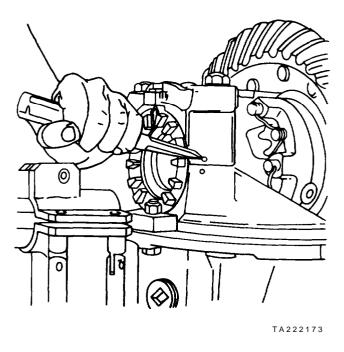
Center Punch Carrier Legend Bearing Cap
